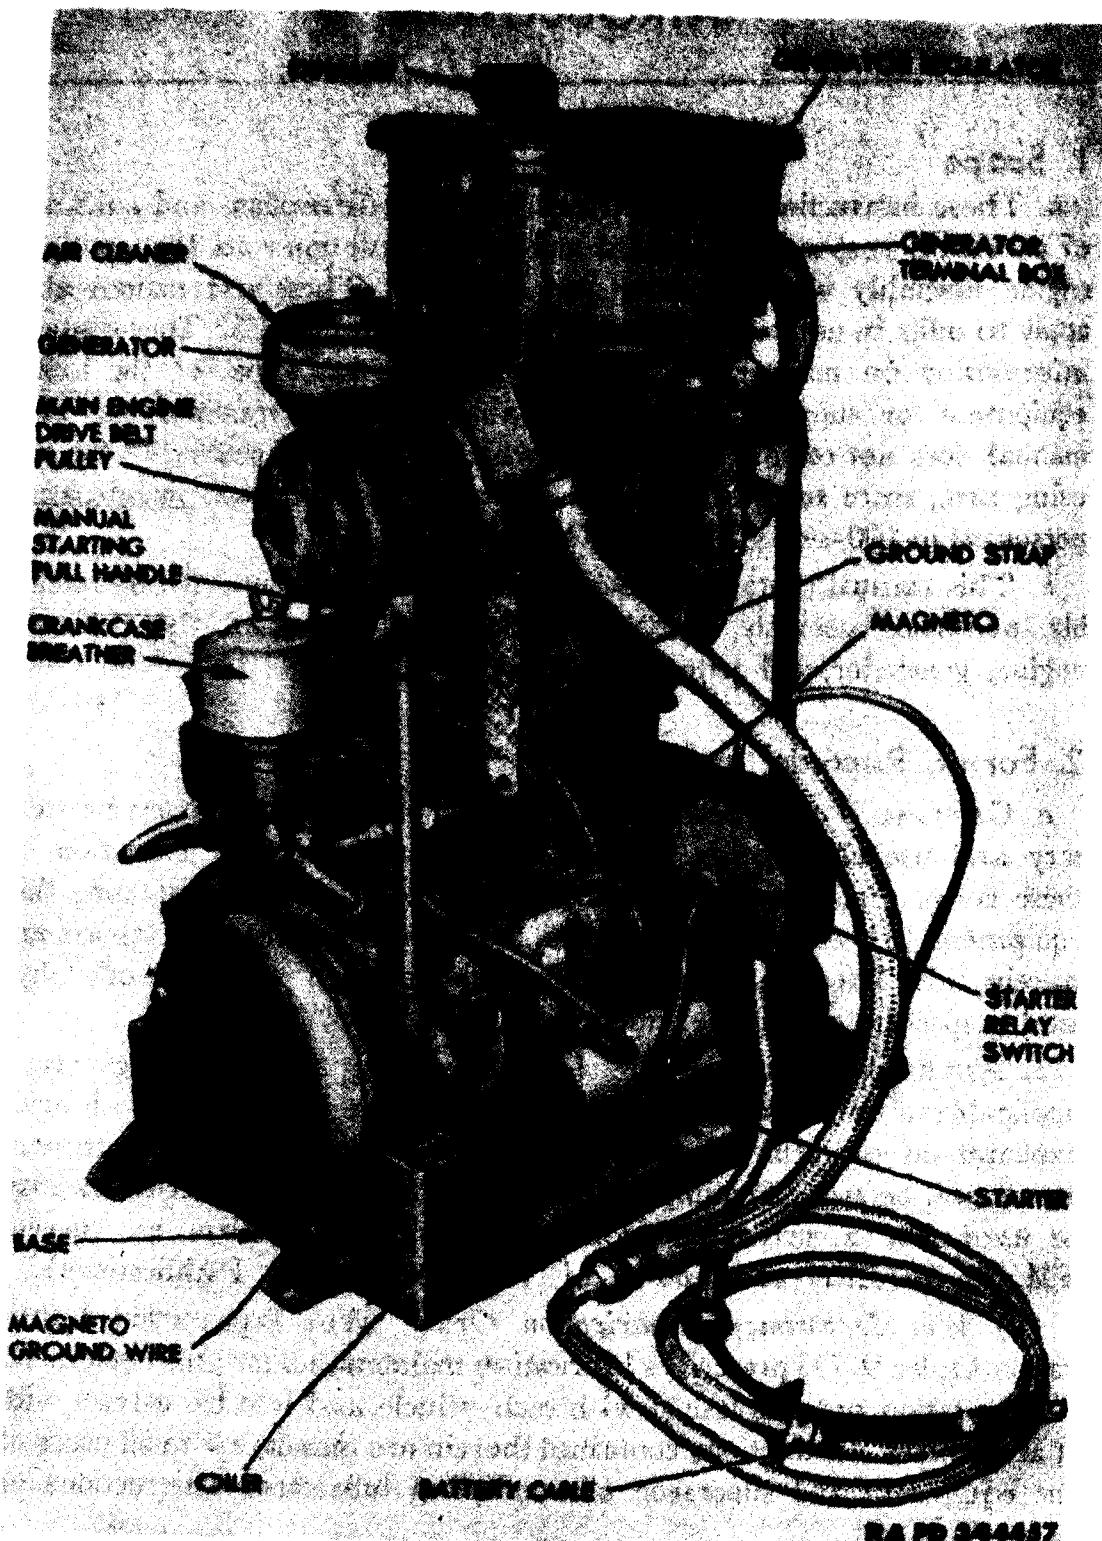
Auxiliary engine w/generator and regulator assembly—left front.
